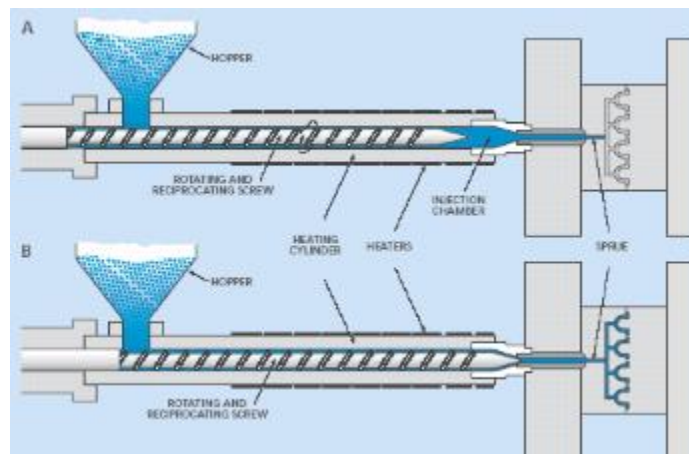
Schematic cross-section of a typical screw injection-moulding machine, showing the screw in the retracted (A) and forward (B) position.
